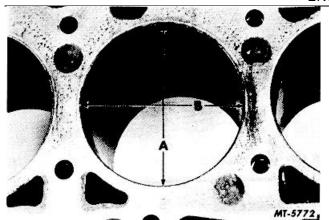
Measurements for Checking Cylinder Bore Outof-Round
